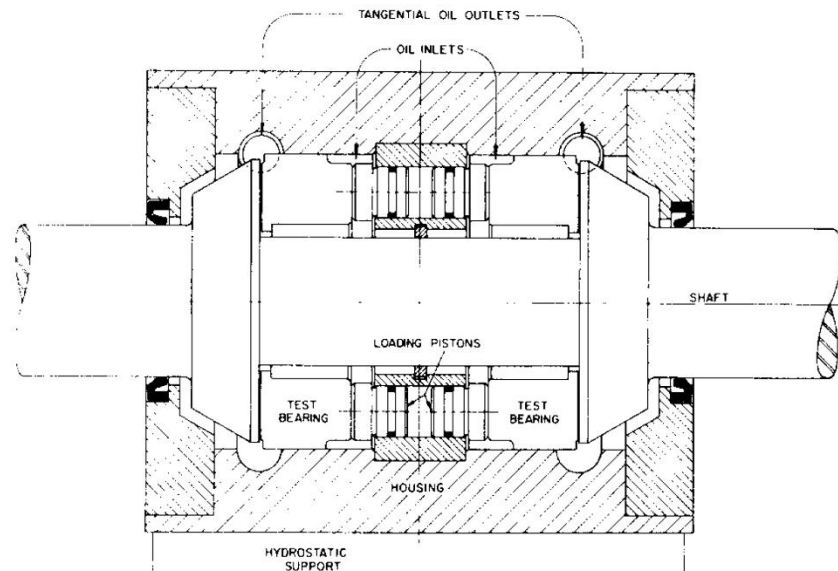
Gardner back-to-back test rig for testing hydrodynamic bearings [7]
